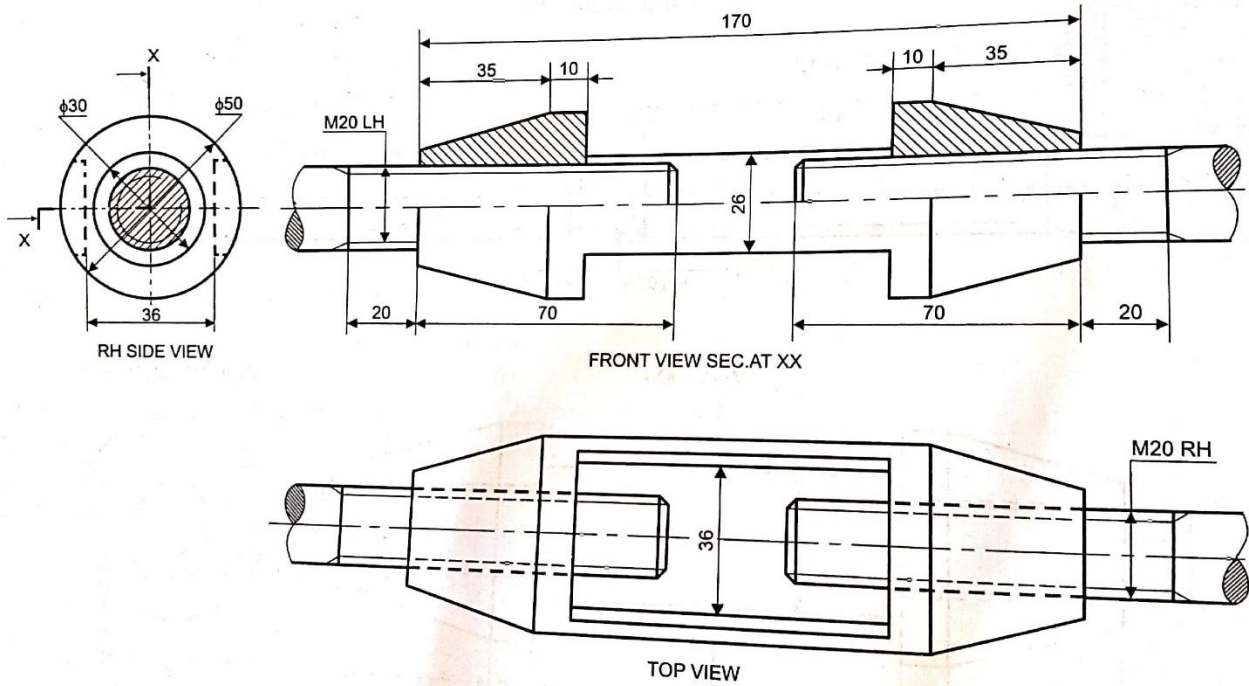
TURNBUCKLE (ASSEMBLY)
